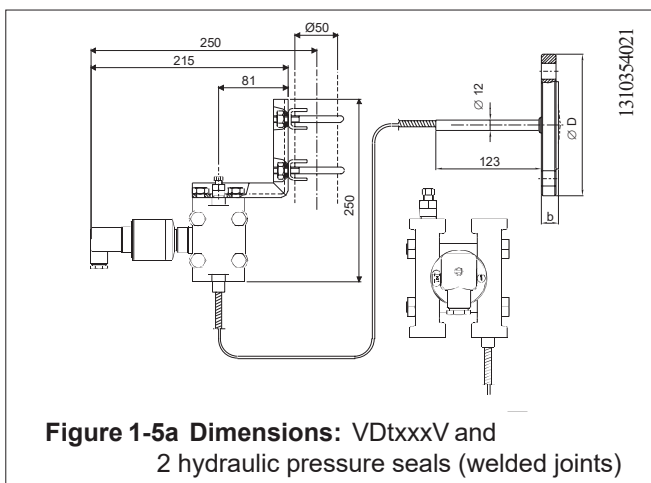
Dimensions: VDtxxxV and 2 hydraulic pressure seals (welded joints)
